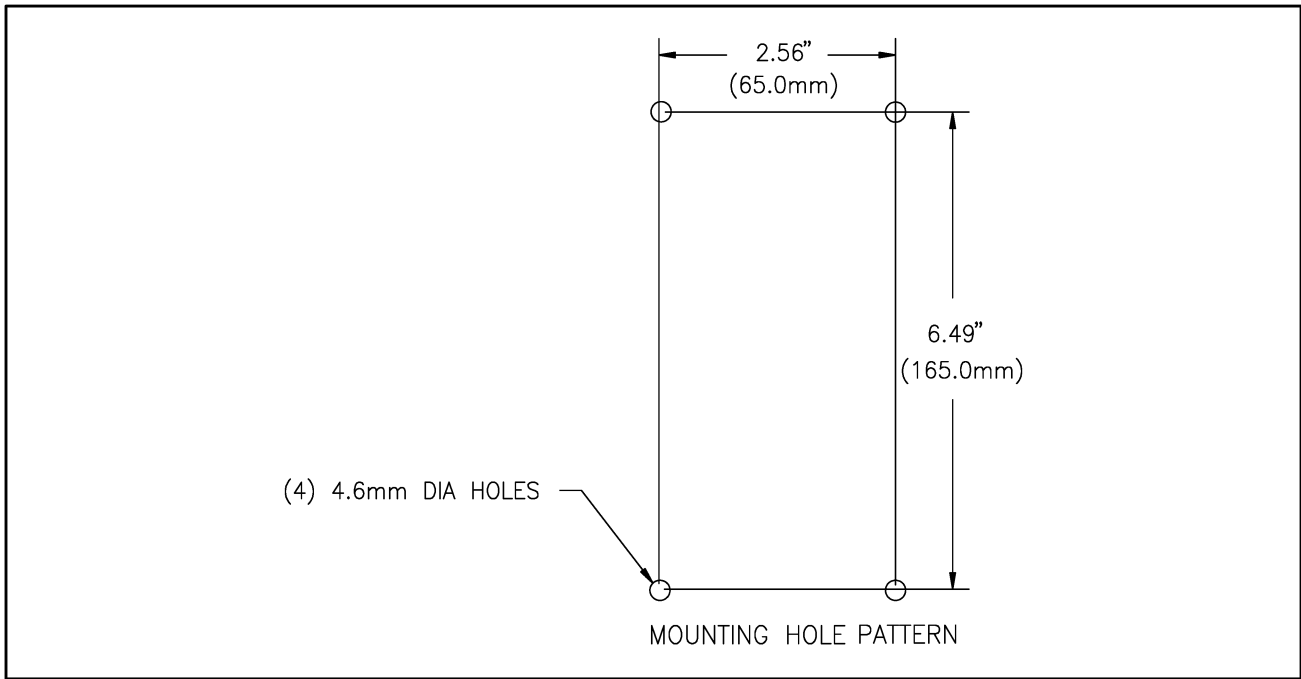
Inverting Fault Circuit Breaker Mounting Hole Pattern
